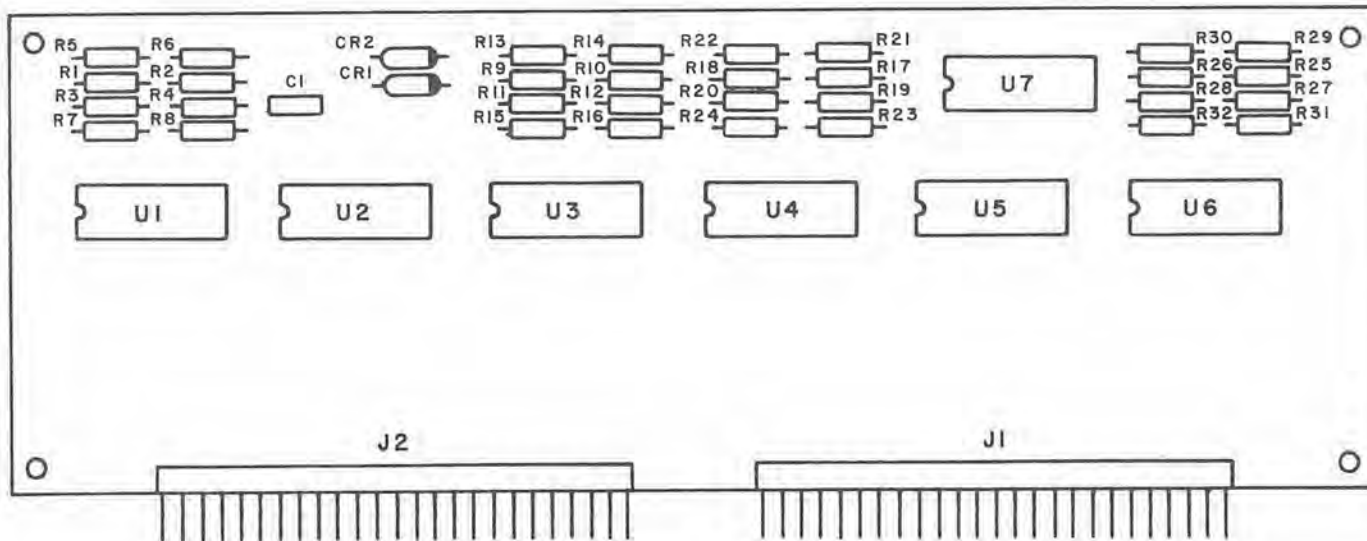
Remote Control I/O Board A14 Parts Location Diagram
